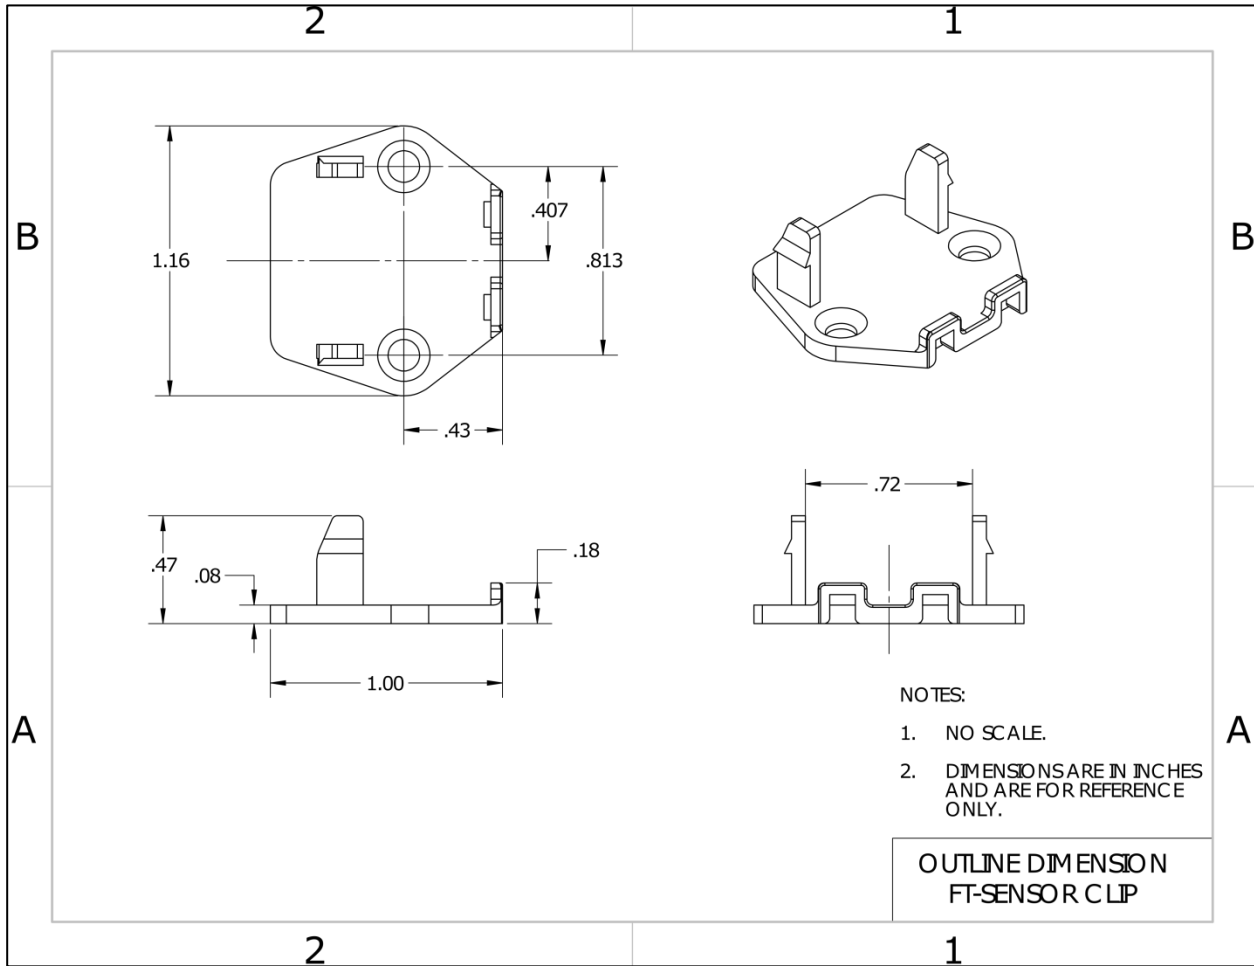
OUTLINE DIMENSIONS (APPROX.), VIPER™ FT SENSOR CLIP
